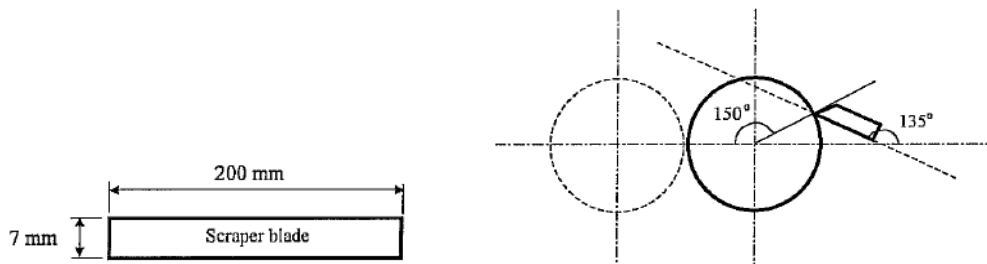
Scraper blade and holder dimensions and location in the rig
